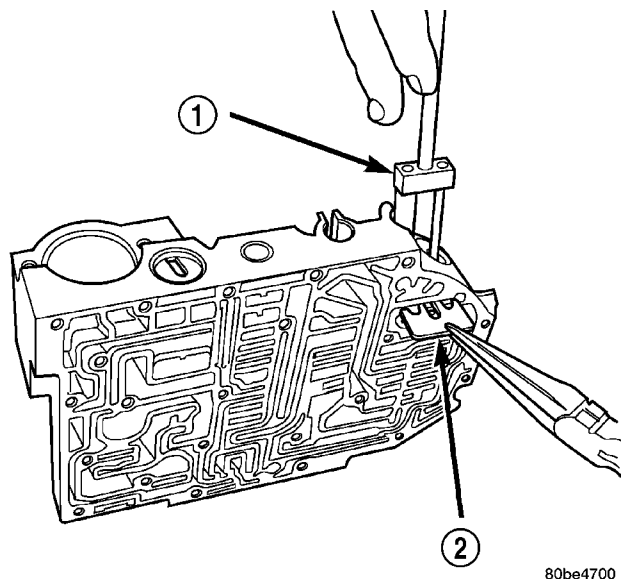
Remove Dual Retainer Plate using Tool 6301
